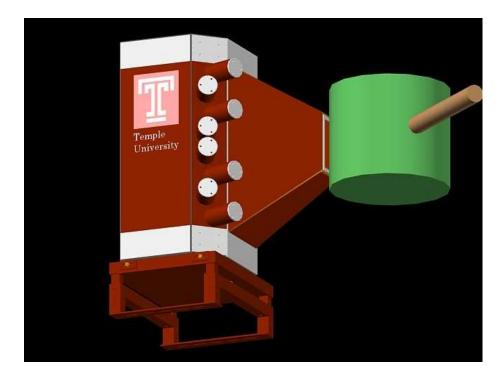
CAD drawing of the gas Cherenkov installed on its stand.
